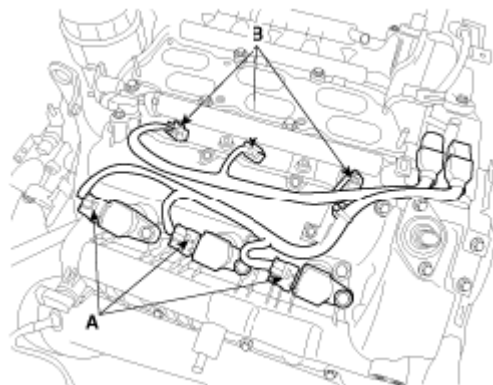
Identifying RH Ignition Coil Connector & Injector Connector
